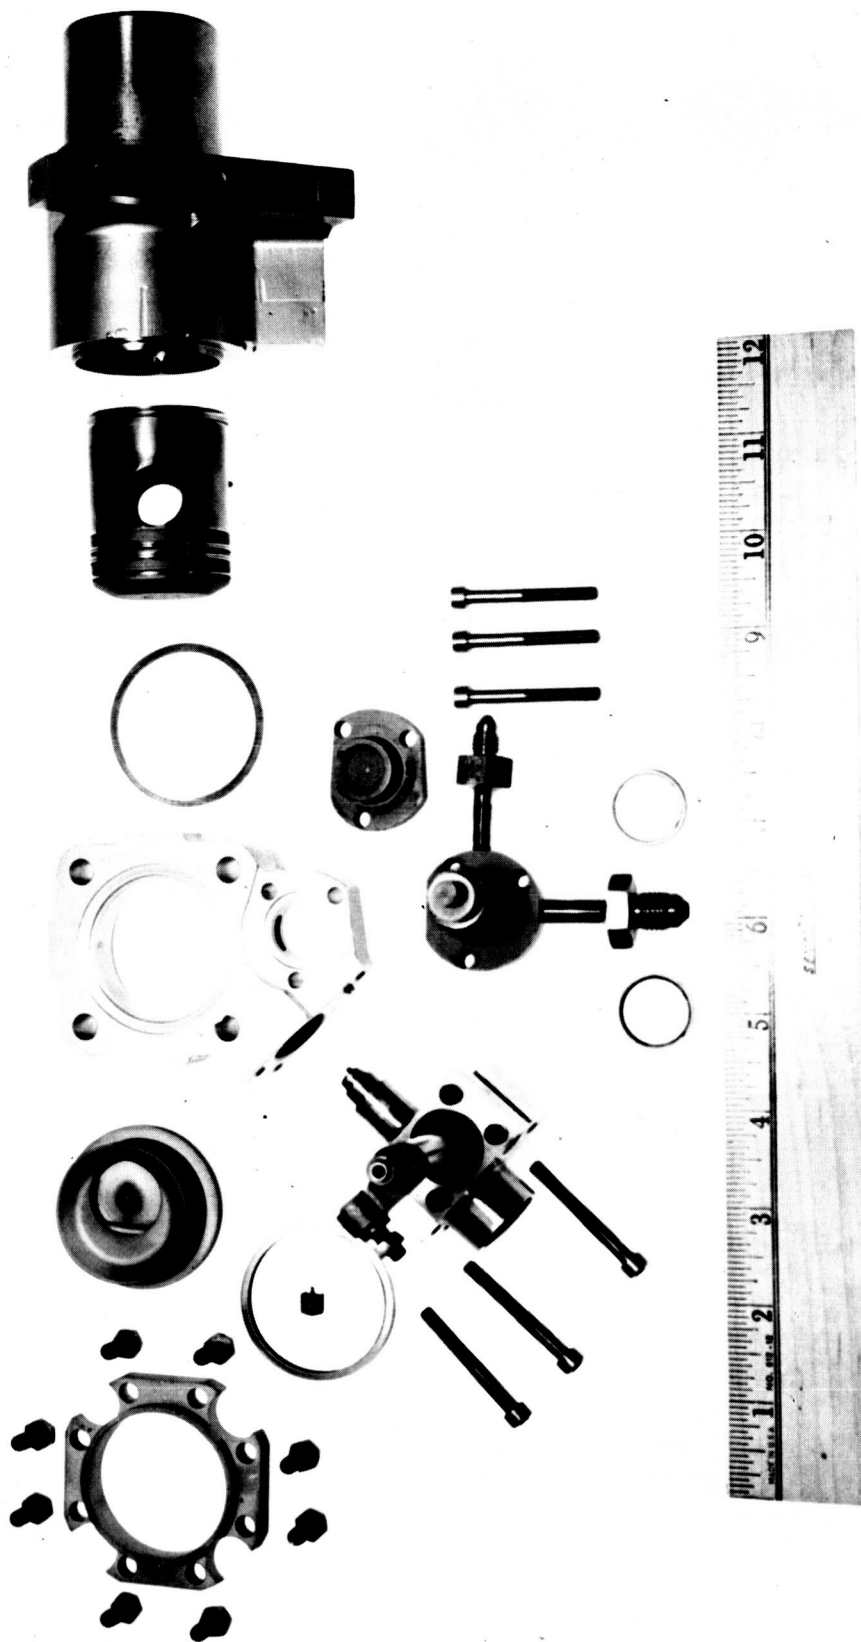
Engine Cylinder, Piston, Cylinder Head,
